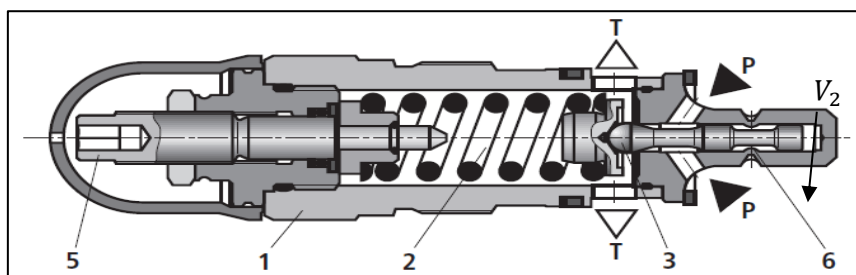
5 Assembly Drawing Pressure Relief Valve [14]
